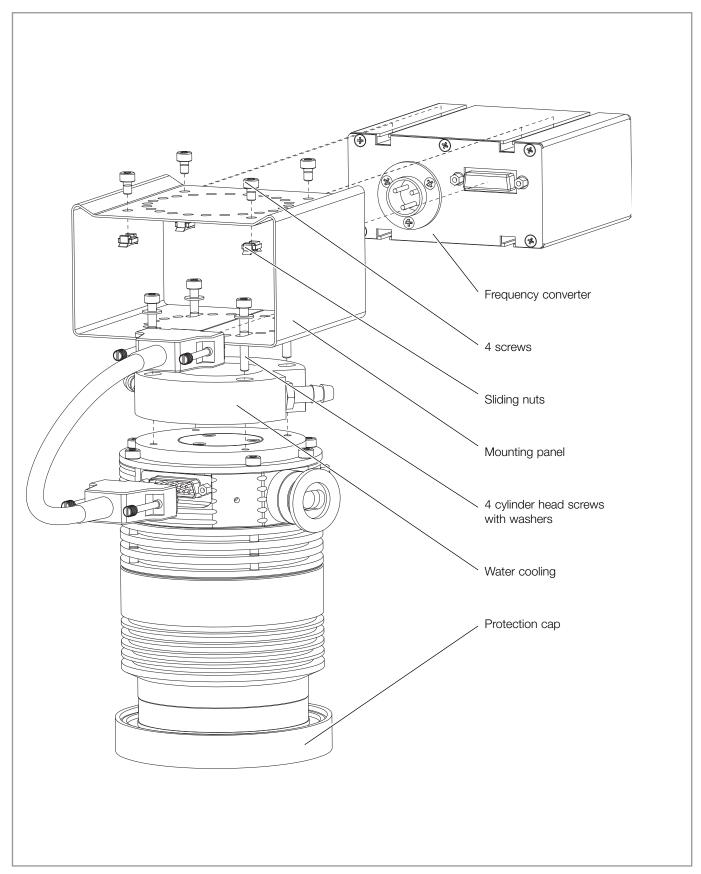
Mounting water cooling and frequency converter underneath the pump
